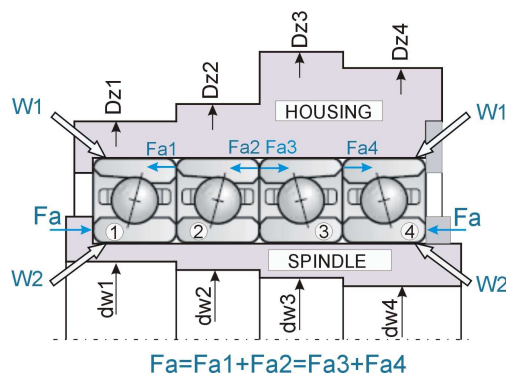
Equilibrium of axial forces in a set of four preloaded bearings
